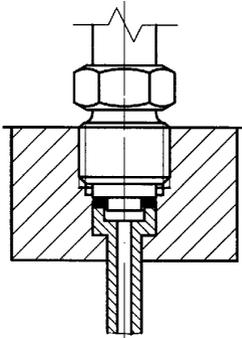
Cylindrical thread, sealing with seal at sealing surface
